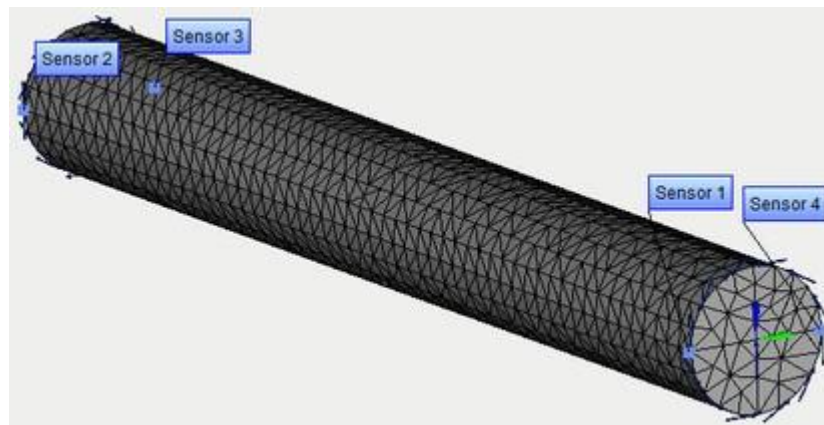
Example FEA mesh on a cylindrical shaft [36]
